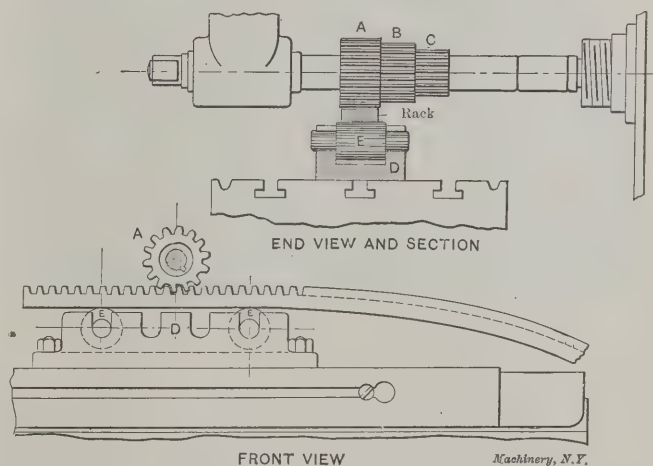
Straightening Cold-rolled Racks in the Milling Machine.
